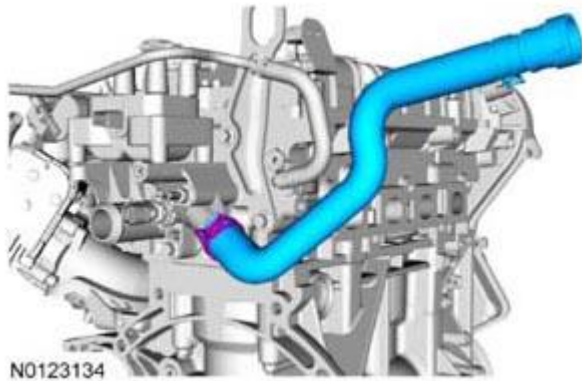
Identifying Coolant Hose To Coolant Outlet
